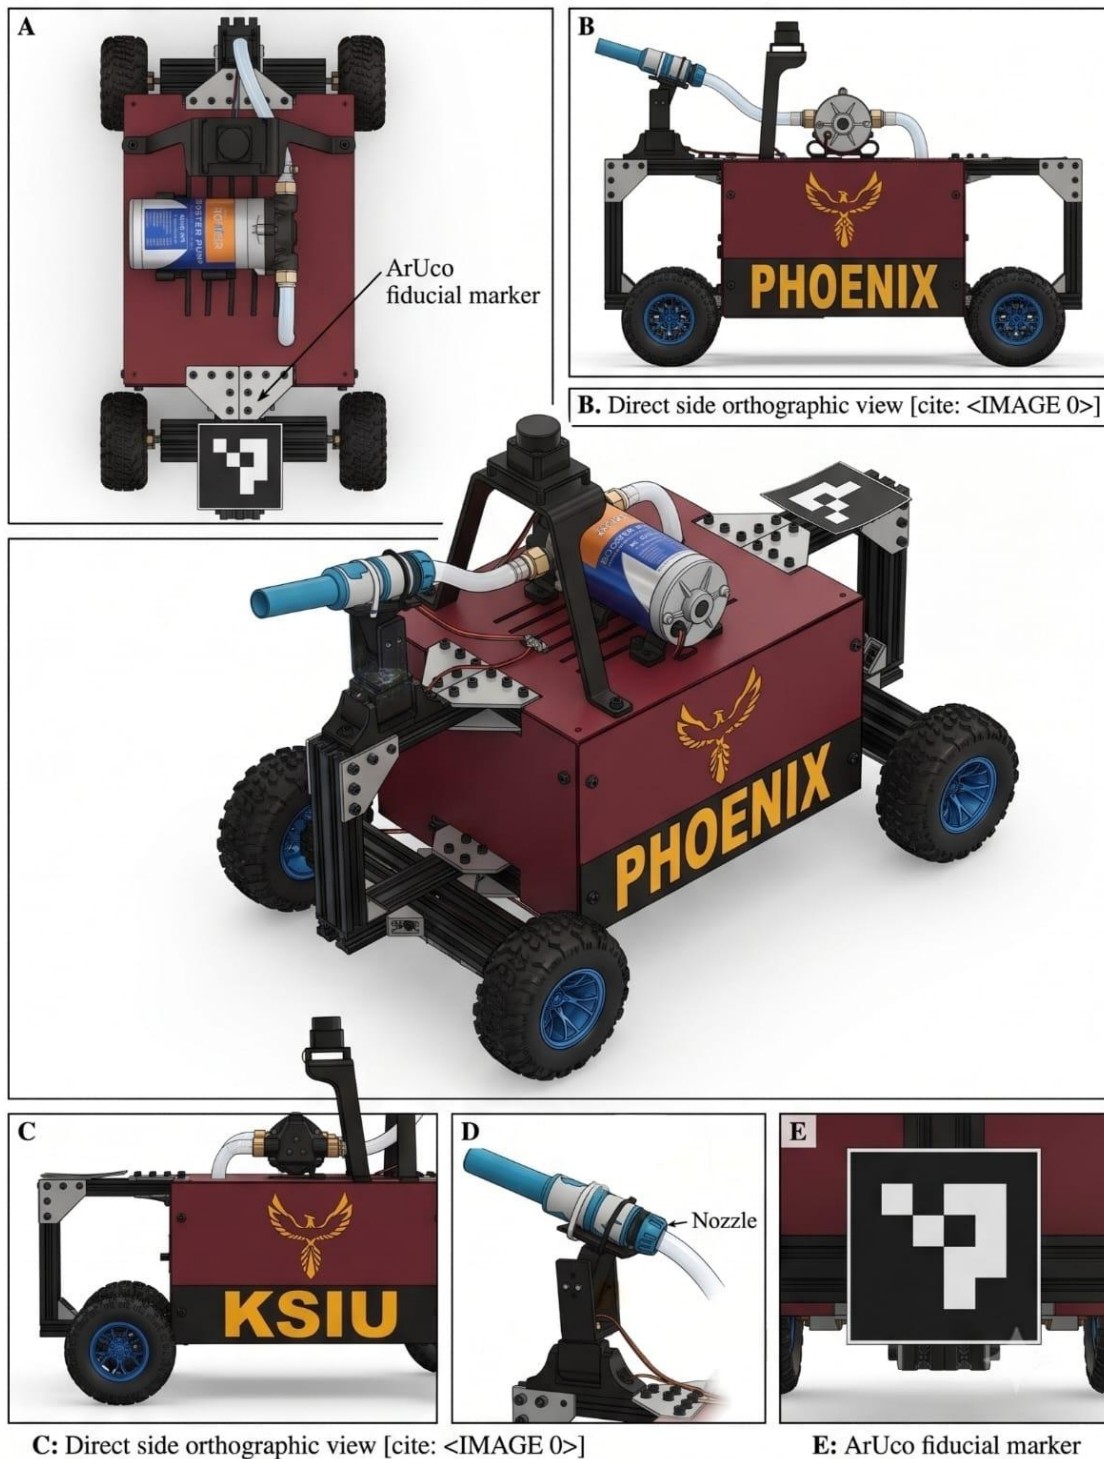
PHOENIX UGV Prototype - Multi-View Orthographic & Perspective Layout
